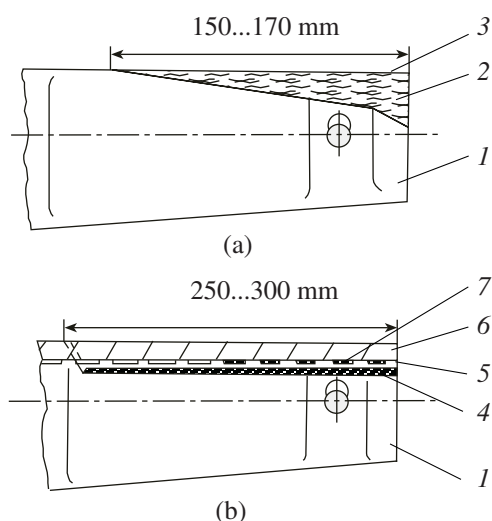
The view of rotor blades after they were restored by (a) surfacing and (b) welding. (1) Worn feather, (2) metal restoring the size of the chord, (3) erosion-resistant metal, (4) butt weld, (5) insert, (6) stellite straps, and (7) welded seams.
